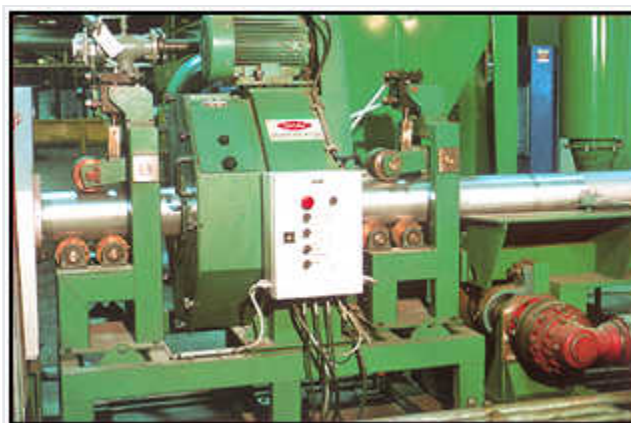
Brushing machine for cleaning logs (Photo courtesy of OMAV)
